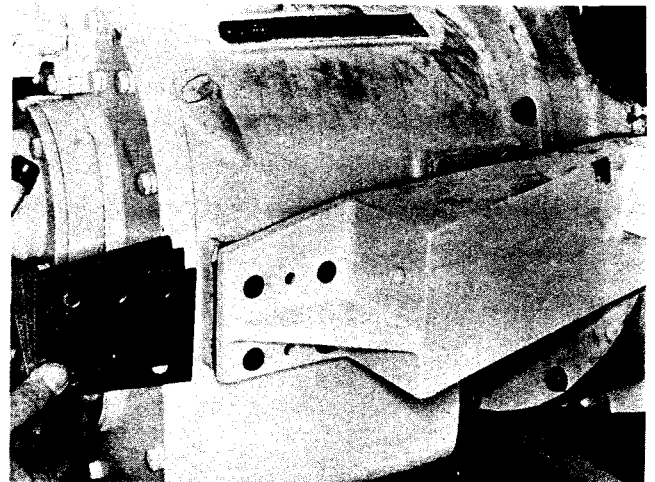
, (V22034). Installing shims for marine gear alignment
